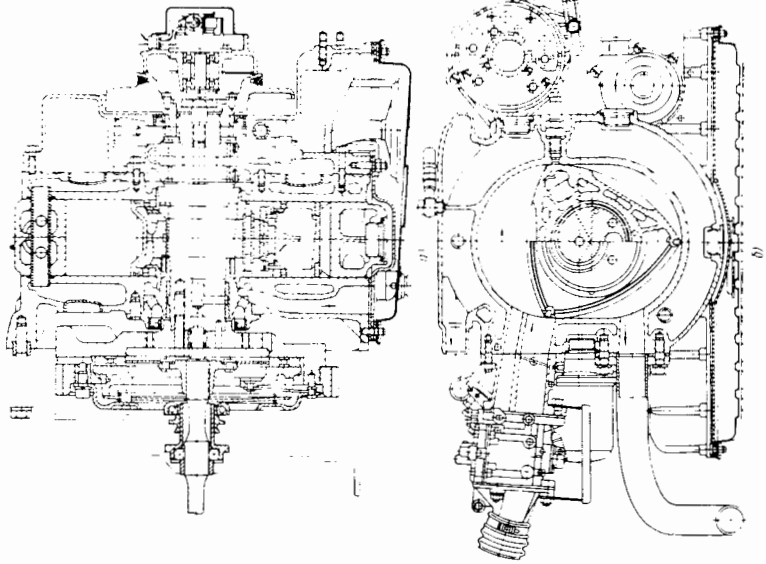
Sectional drawing of NSU model KKM 502 single-rotor engine
